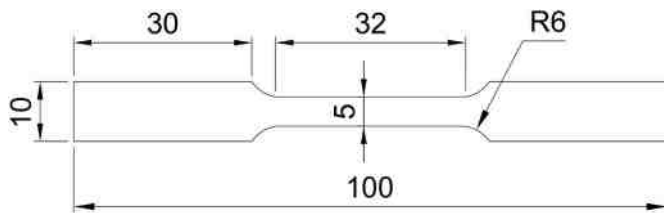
Schematic of the tensile samples used for testing (All the dimensions in the schematic is in mm).
